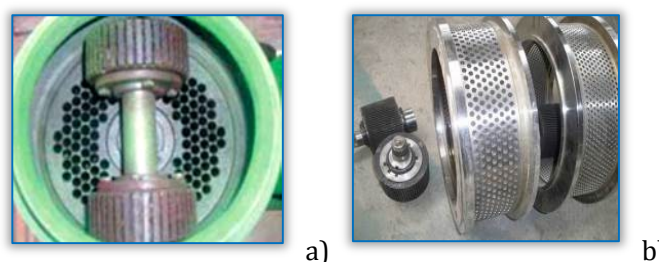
Examples of dies and pressing rolls (a – flat die, b – cylindrical die) [2, 15]
